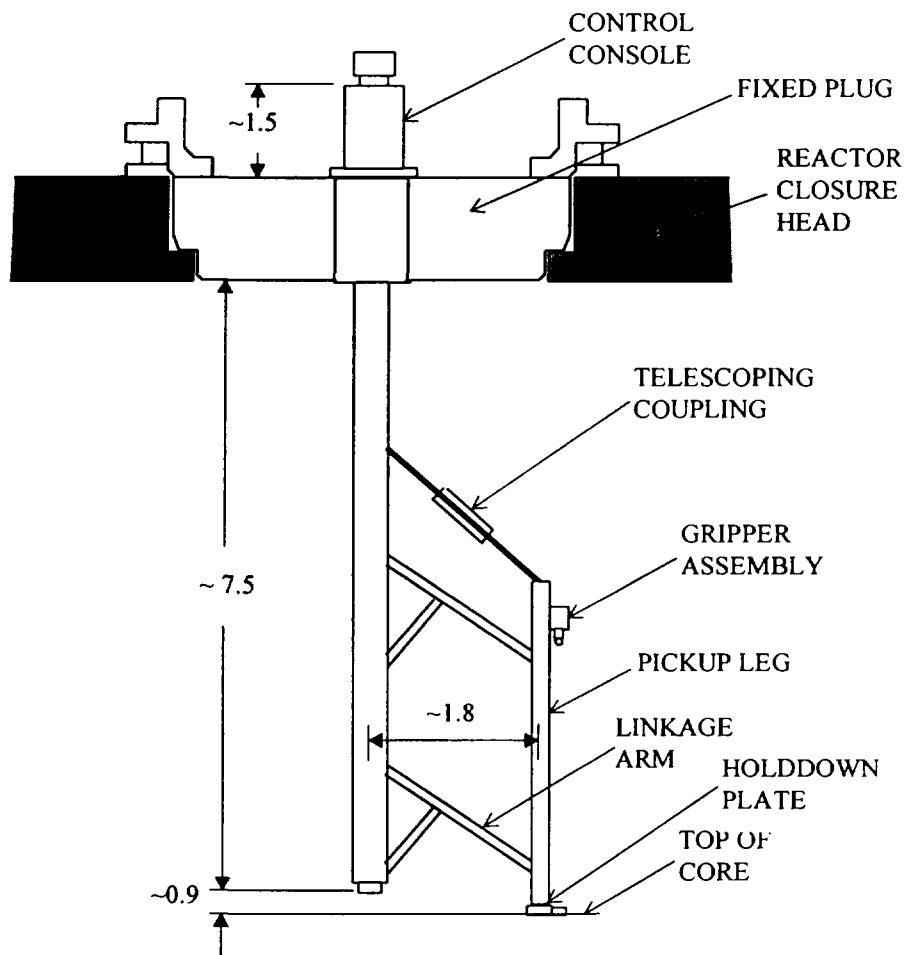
In-Vessel Fuel Transfer Machine (to be updated)
